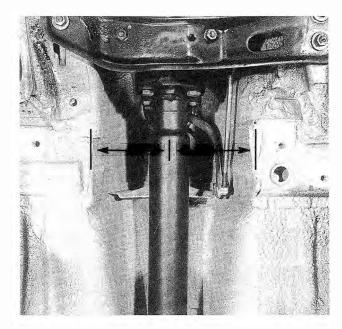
Driveshaft side-to-side alignment. Driveshaft should be centered between the edges of the drive-shaft tunnel as shown.
